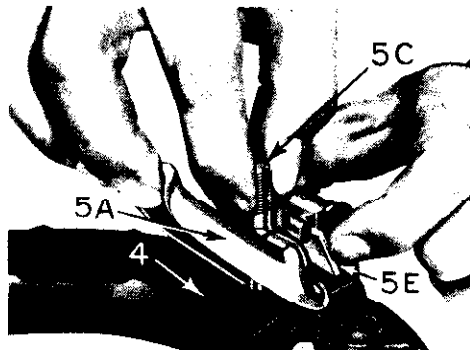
Illustration No. 31—Figure No. 7 Showing Assembly of Clutch Fingers—J-20 Models
